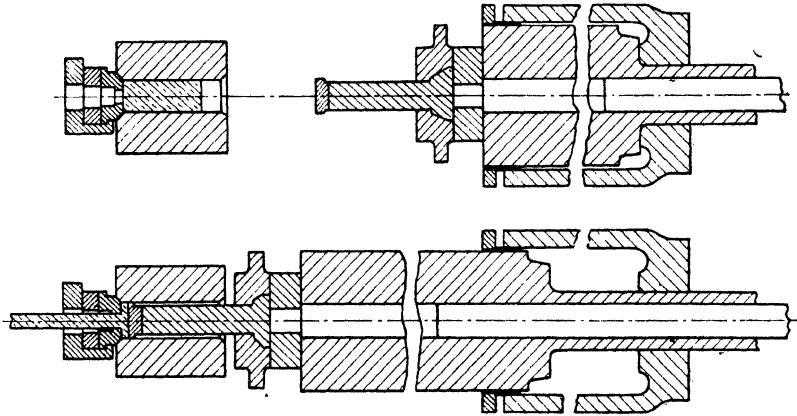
and 269.—Two views of a 2000-ton Hydraulic Horizontal Extrusion Press fitted with internal mandrel-moving cylinder, for the production of solids and tubes.
